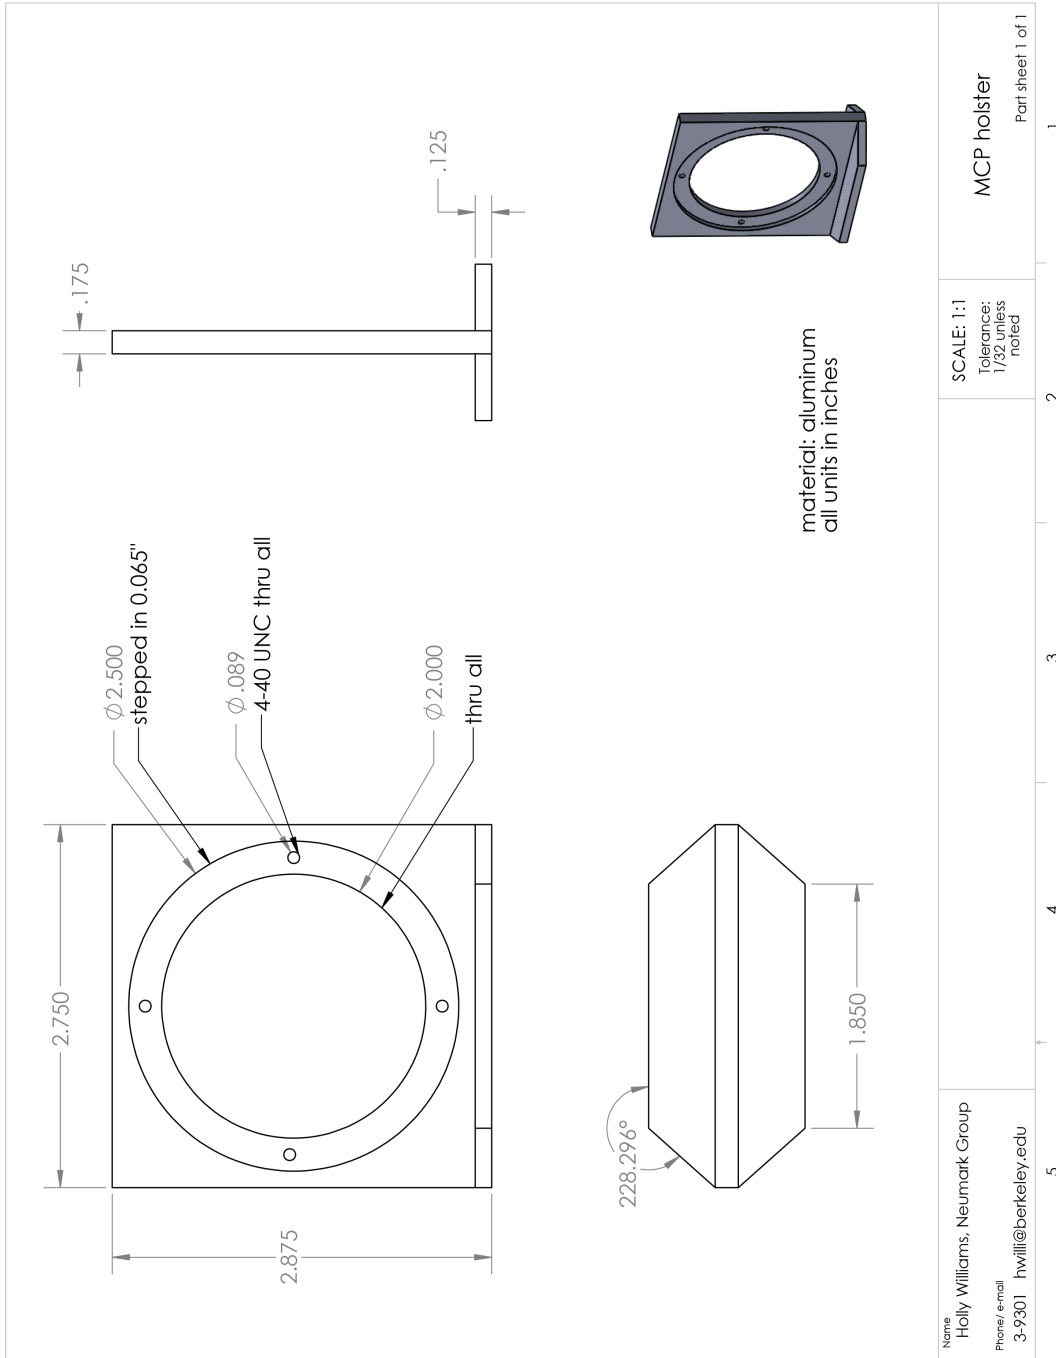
MCP and phosphor holster machine drawing. Toe clamps will be used to fasten the holster to the breadboard of the stage. The holster is made from aluminum.
